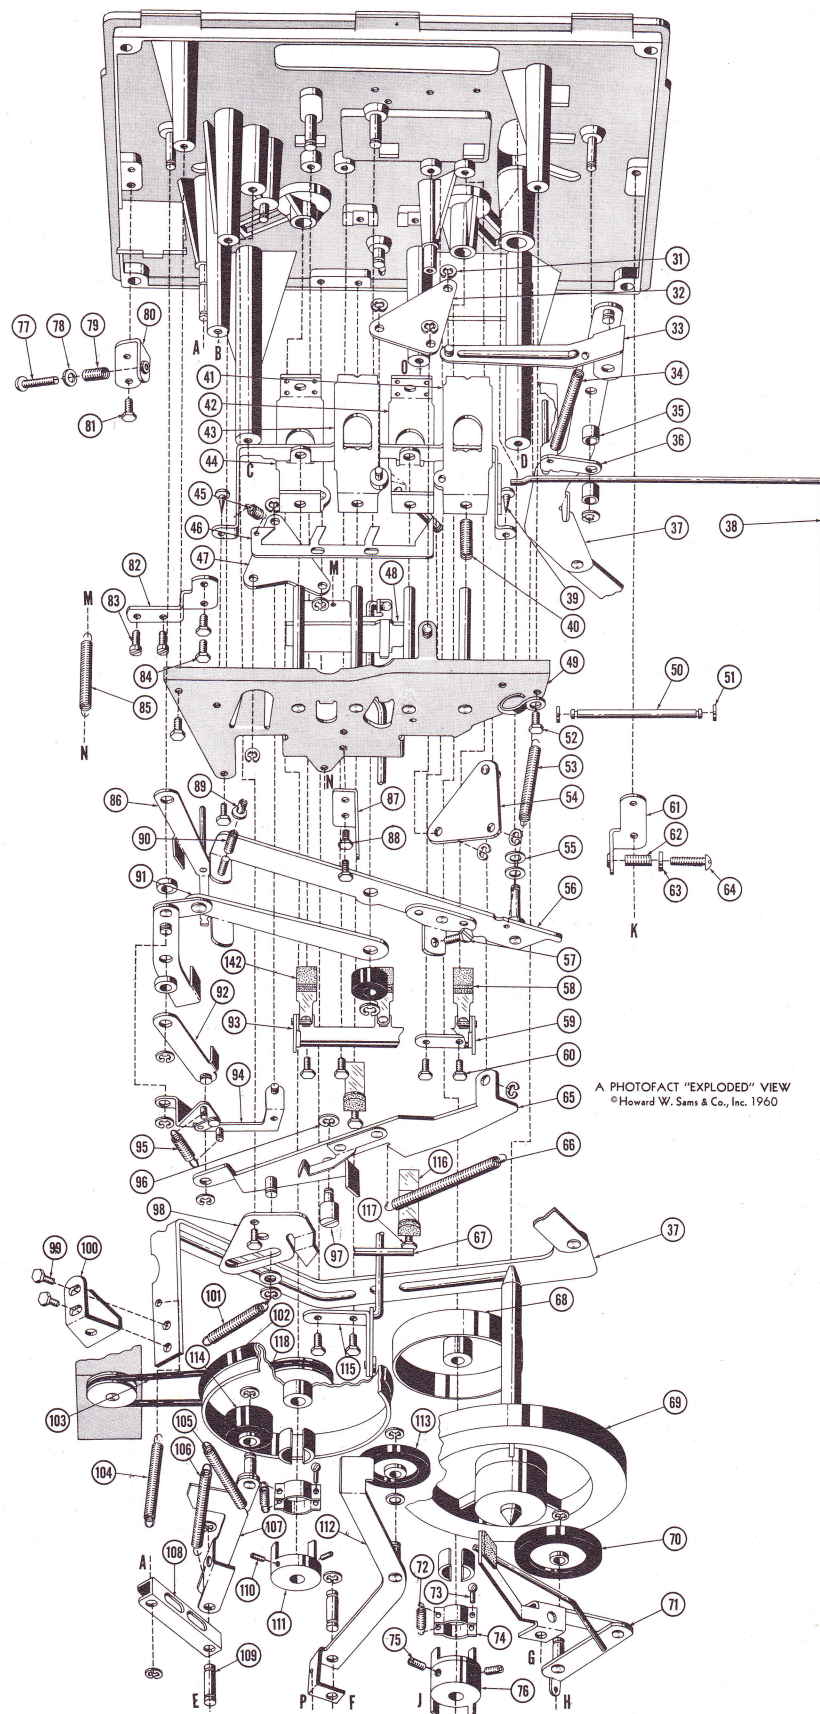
C EXPLODED VIEW OF PARTS BELOW MOTORBOARD
